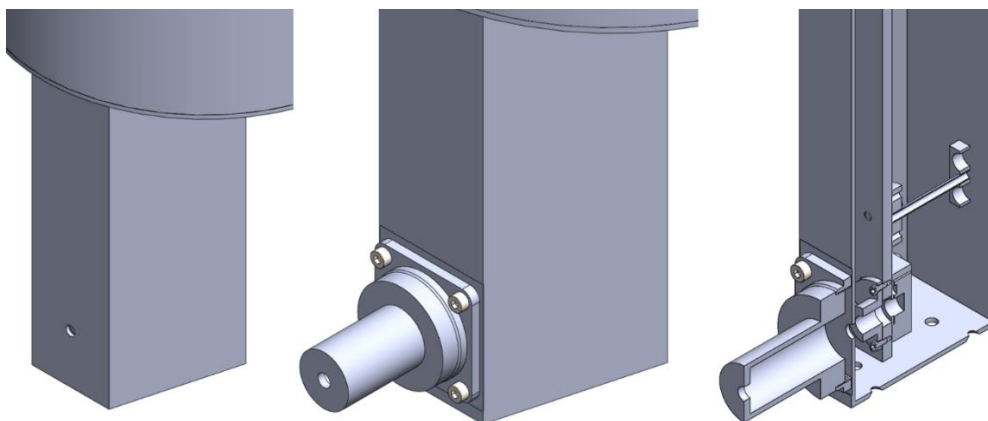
Left: original structure of the LN₂ cold shield on the V2 bolometer. Middle: Modified cold shield with an adaptor flange and a 30 mm long extension aperture of 4 mm diameter. Right: section view of the modified cold shield.
